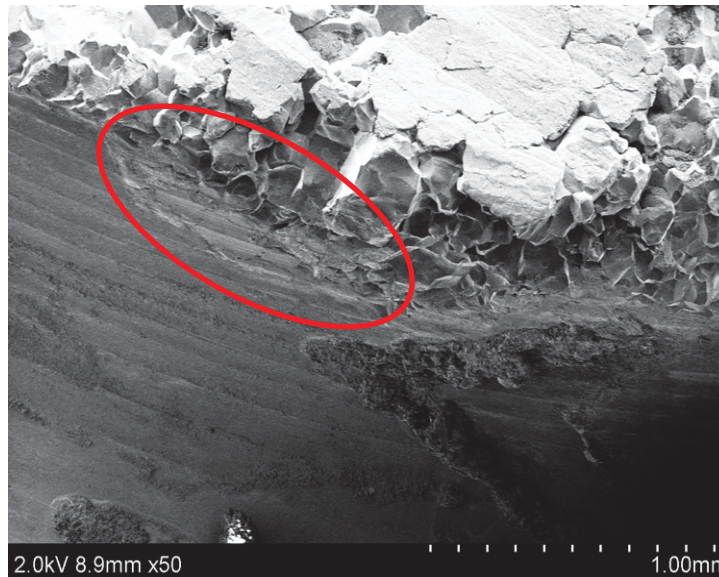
Side view (50x) of FF1, Specimen II at 180° Position (after cleaning).
